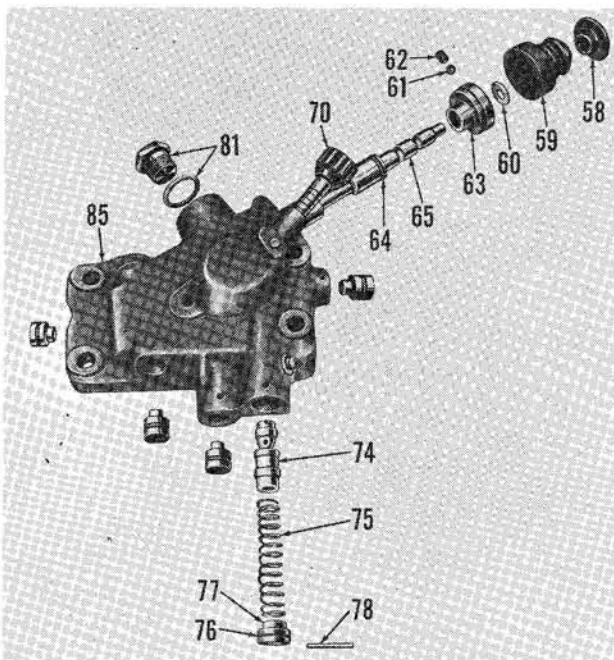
Exploded view of flow control and selector valve assembly; refer also to Fig. 210.
